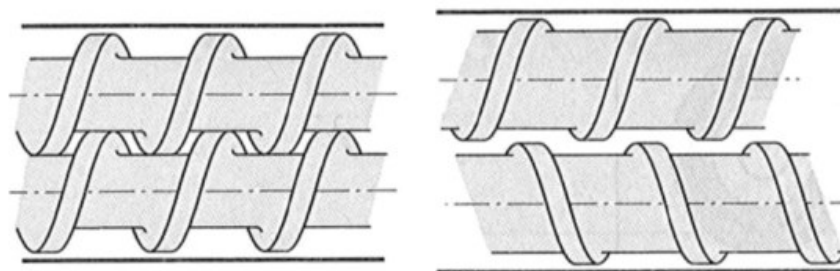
Interpenetrated (left) and Non-interpenetrated (right) Screw System [52].
